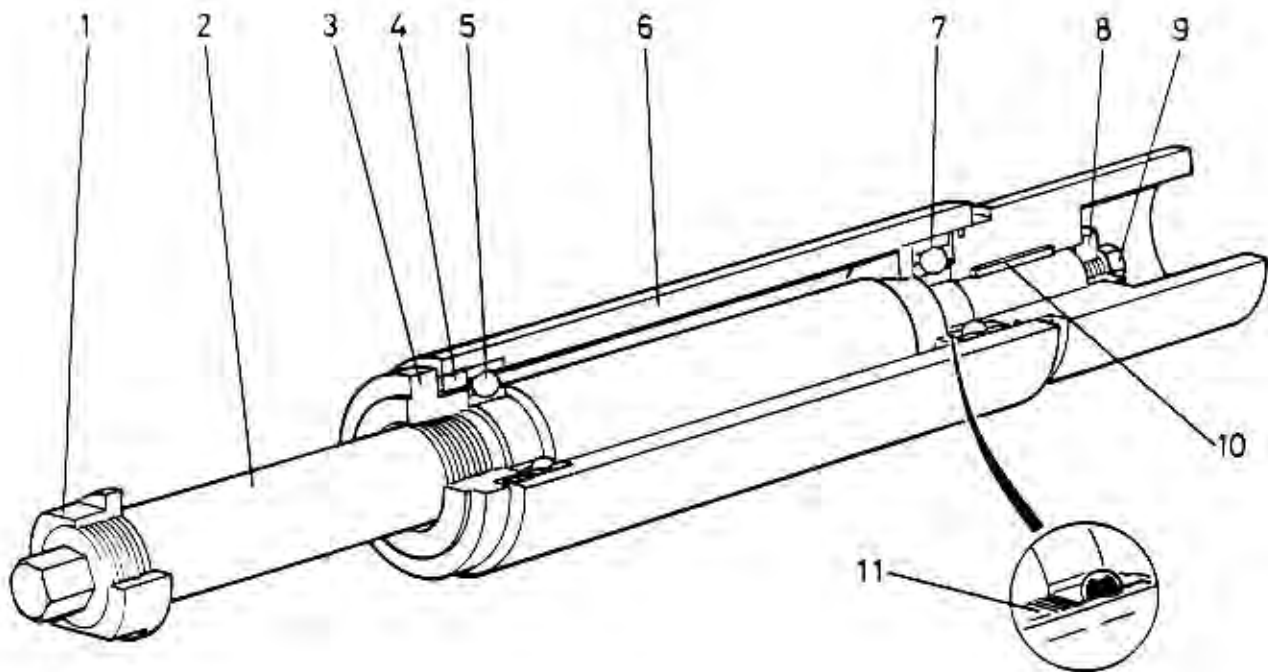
FENCE SIDE HEAD SPINDLE UNIT - 40MM DIAMETER SQUARE SHOULDER
